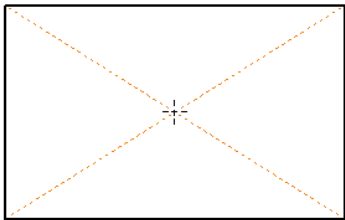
Drawing a rectangle by using the Rectangle Two Point Center tool
